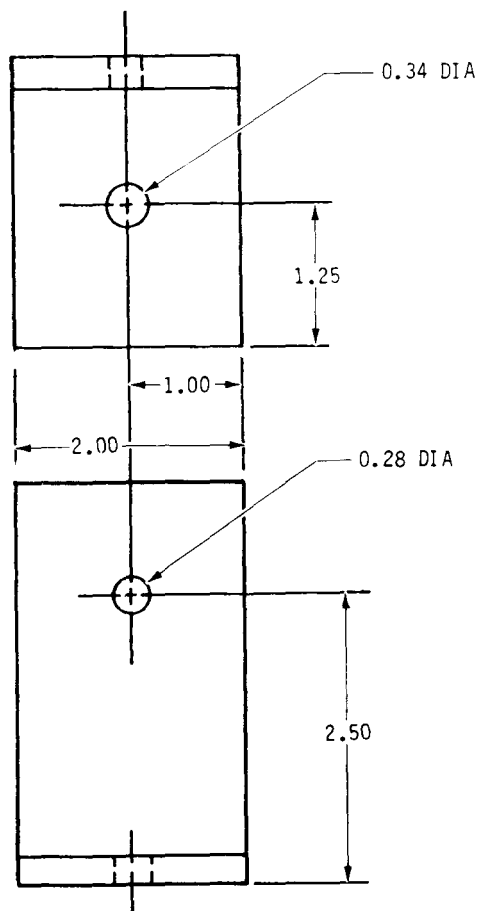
Dimensions for Support Angle-11021151-4, Unit 1, 280, and Unit 2, ISO-2-1.
